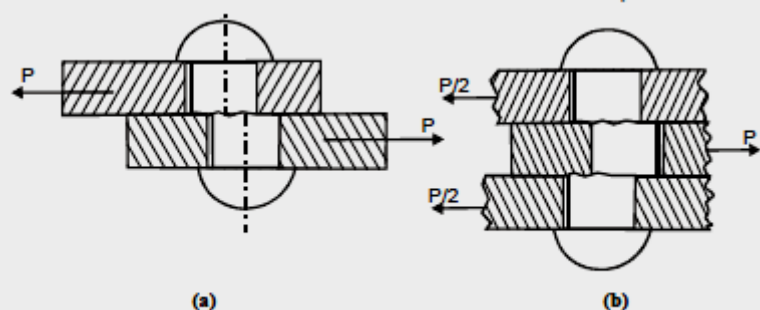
Shearing of Rivet : (a) Single Shear; and (b) Double Shear
